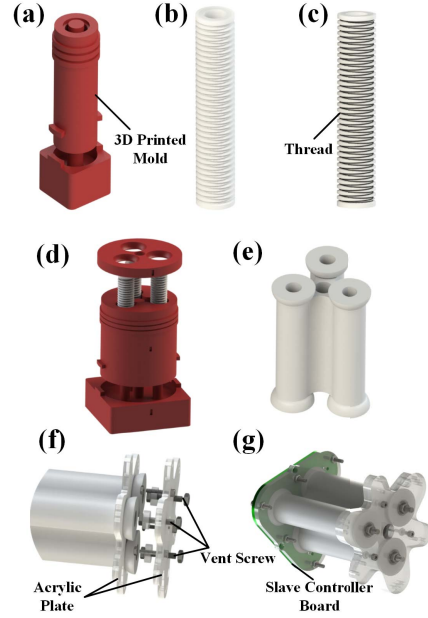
Fabrication process of the 3-D soft robotic bending module. (a) The mold of a single rPAM. (b) The single actuator without thread. (c) The threaded single actuator. (d) The mold of the outer body, which is used to combine the three threaded single actuators. (e) The demolded soft 3-D bending segment. (f) The soft segment sealed with acrylic plates and the vent screw. (g) The assembled soft robotic bending module.
